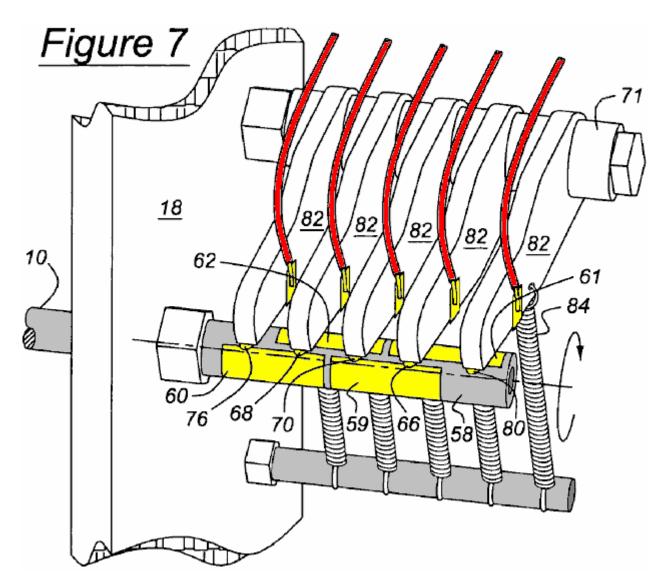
is an isometric view showing the switching contact fingers secured on pivoting arms and seated on the bridge connectors of the switching assembly
